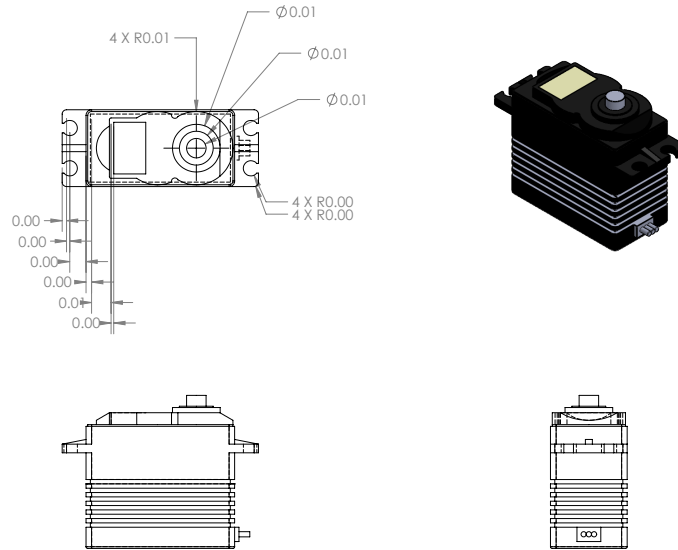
Hi-Tech High Torque Servo. All dimensions in inches
